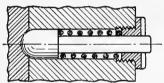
The plunger is turned down slightly smaller than the inside diameter of the spring which gets its other bearing against the threaded plug, the hole in the plug guiding the stem of the plunger.
